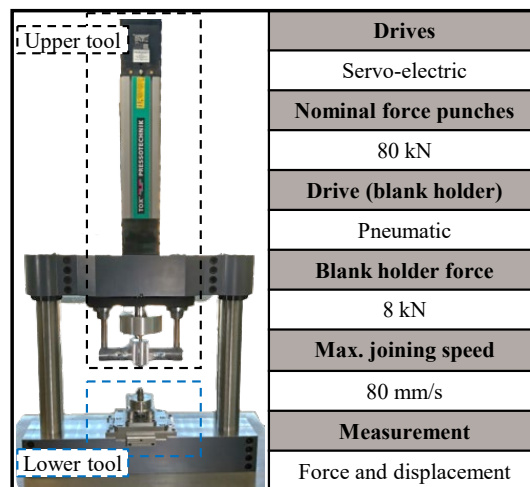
Joining system with extended punch-sided tool actuator technology to process the multi-range capable self-piercing rivets [1].
